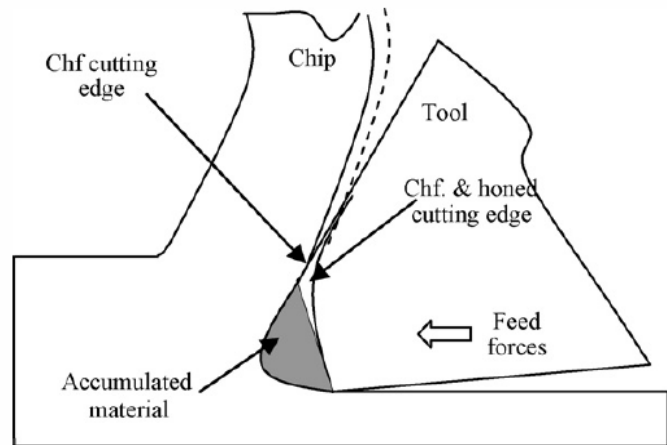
Schematic illustration of chamfered cutting edge with material blockage [103]
